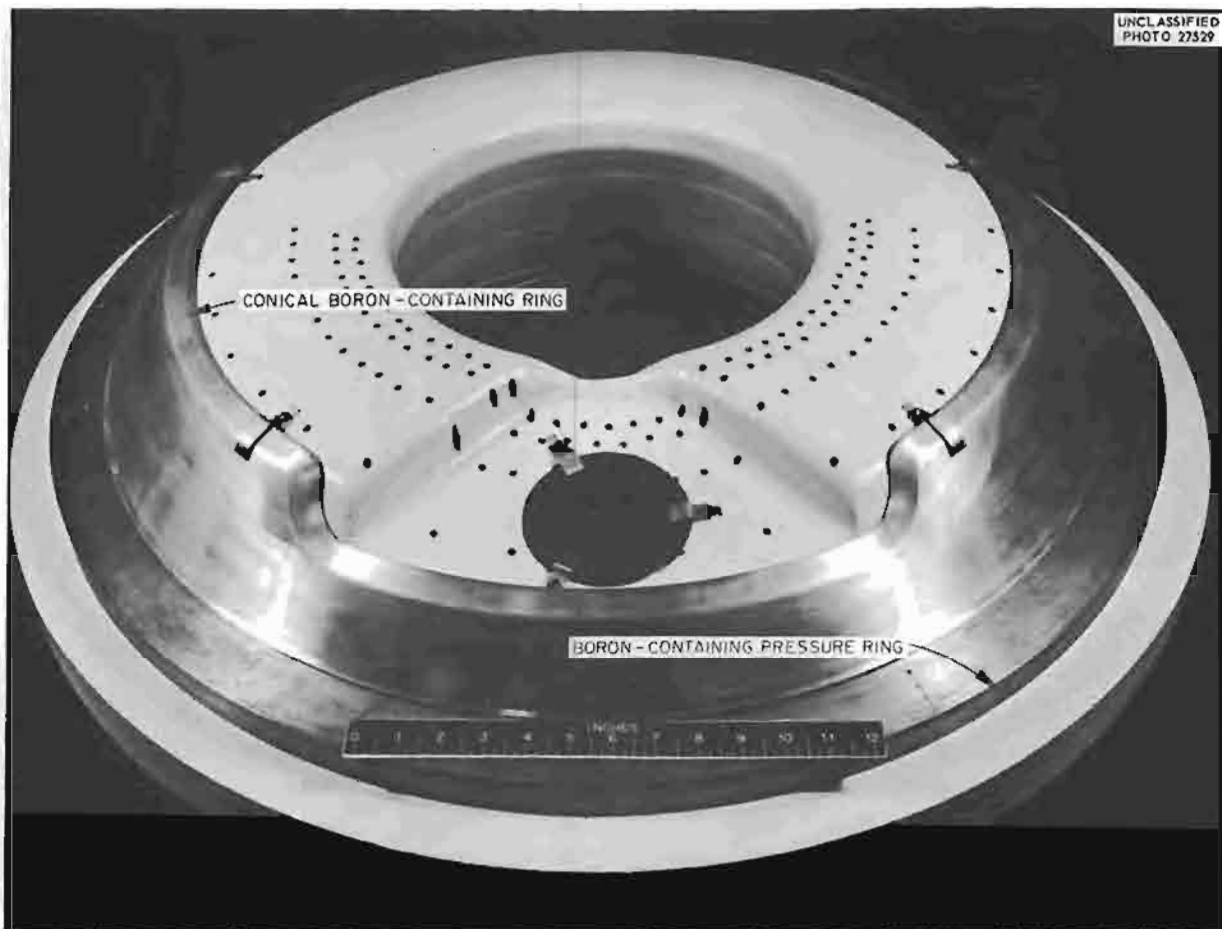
Wooden Model of Top of Reflector Showing Boron-Containing Conical Ring and Pressure Ring Assembly.
